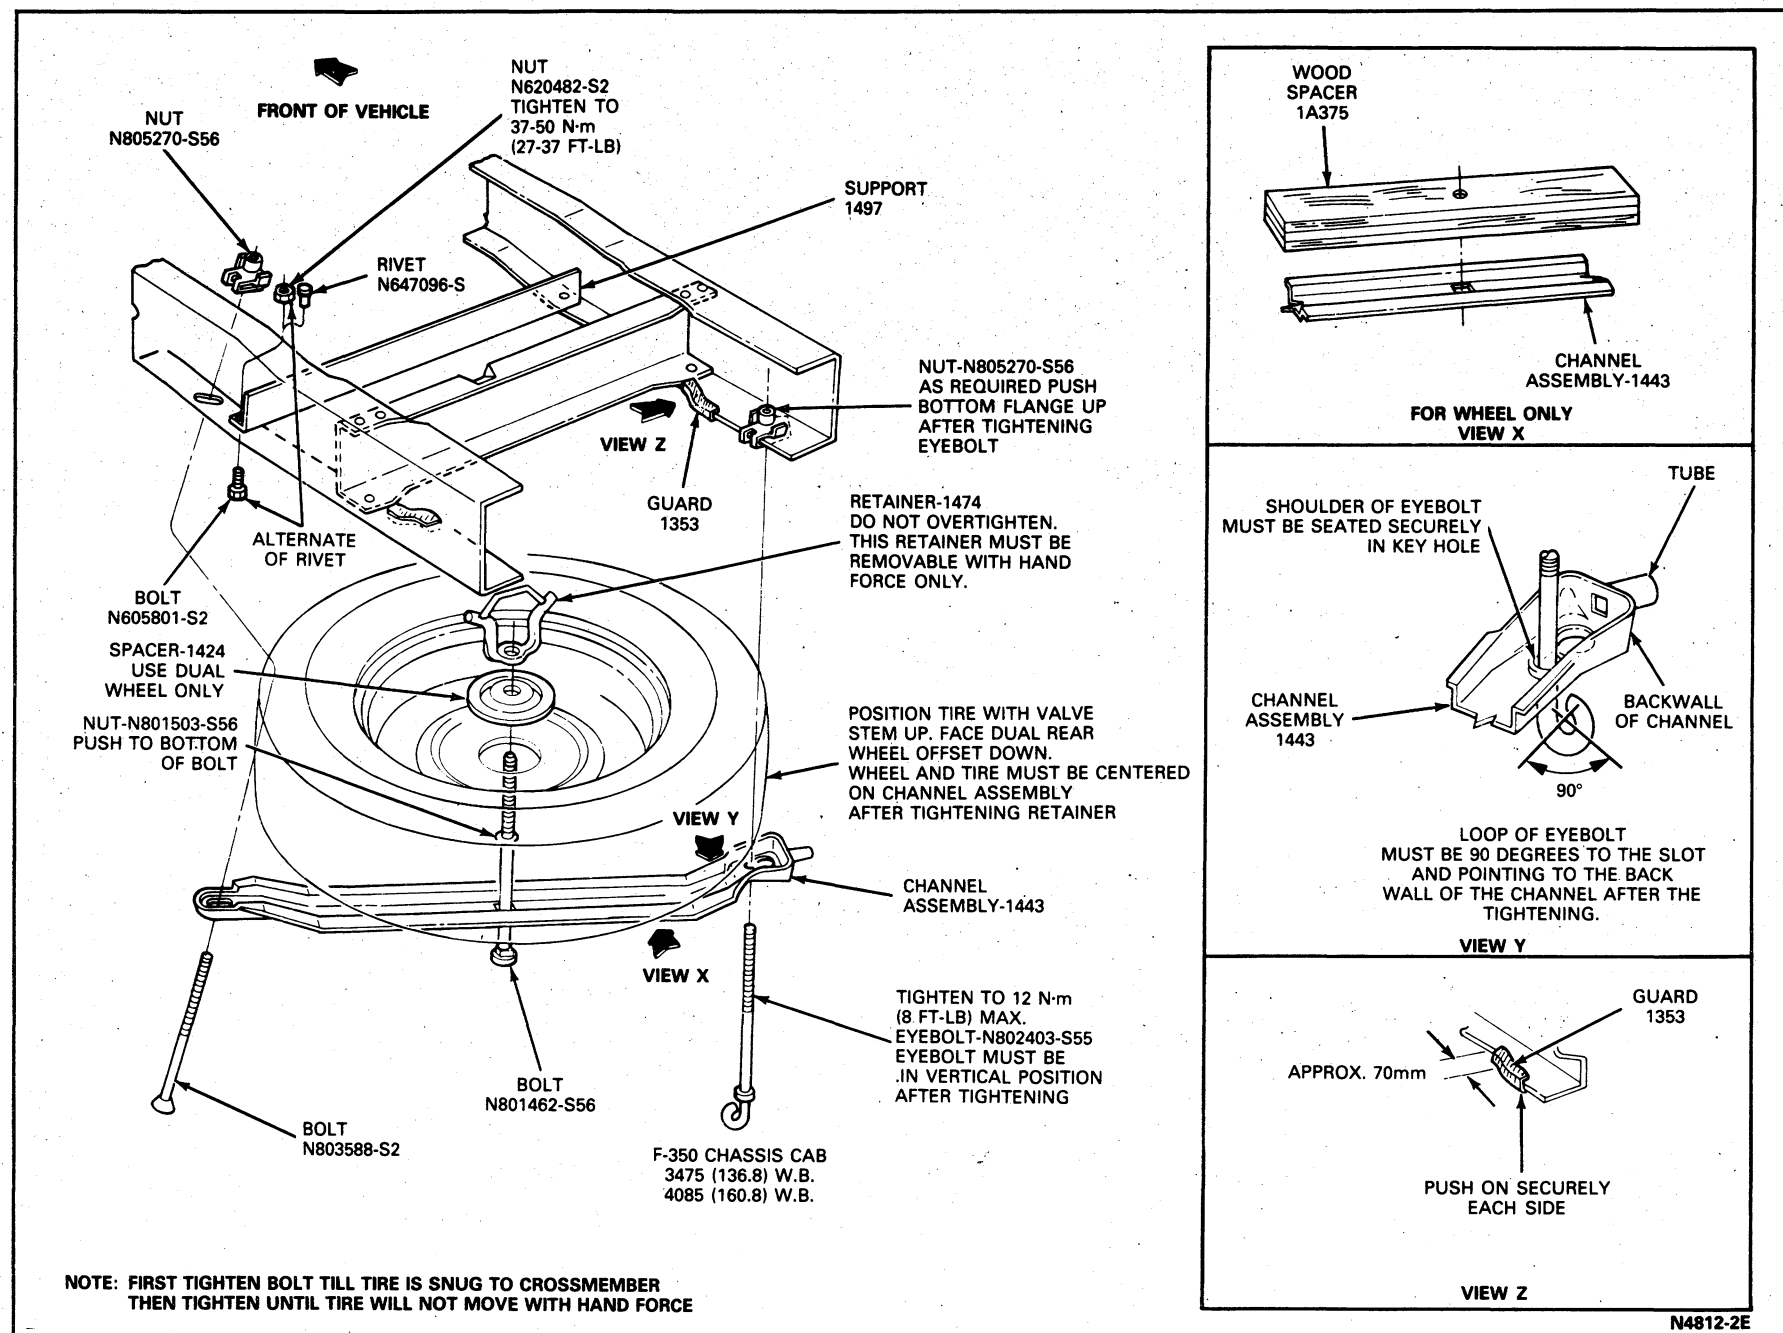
Spare Tire Carrier—F-150, F-250—F-350 With Aft Axle Tank
